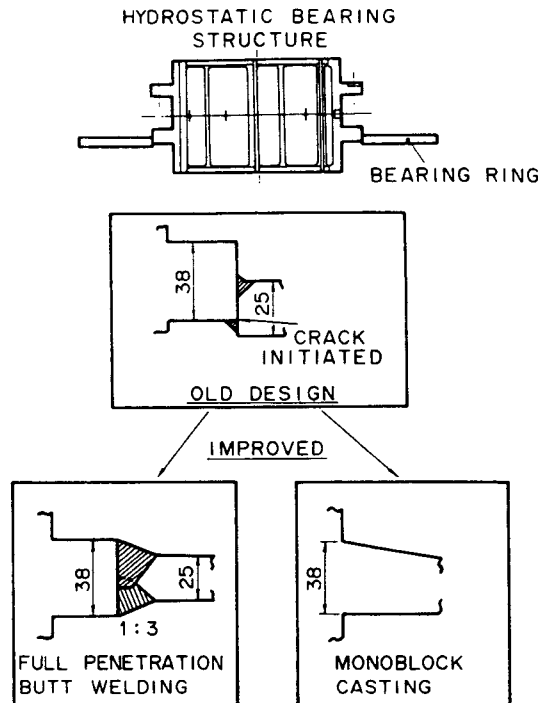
Old and improved designs of hydrostatic bearing structure.
